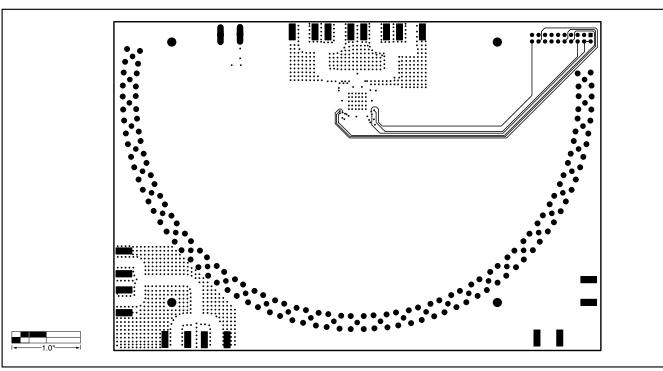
MAX3950 EV Kit PC Board Layout—Solder Side
